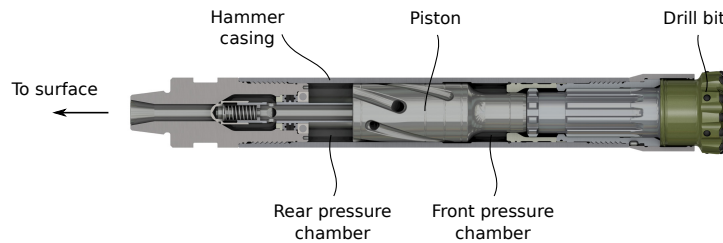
CAD drawing of the 8-in Impax down-the-hole hammer, manufactured by SMITH BITS [51].
